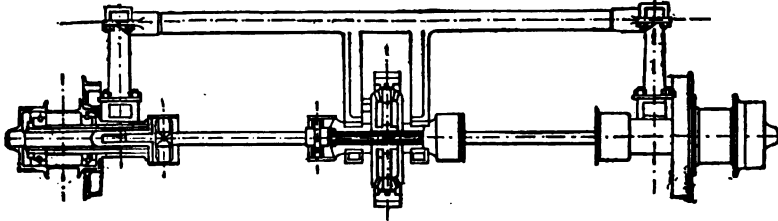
Jointed Rear Axle of the De Dion & Bouton Carriages. By the use of universal joints between the driving spur and wheel spindles a steady drive may be maintained between the spur, hung on the body, above the springs, and the wheels, below the springs, even on the roughest roads, when the springs are constantly in action.
